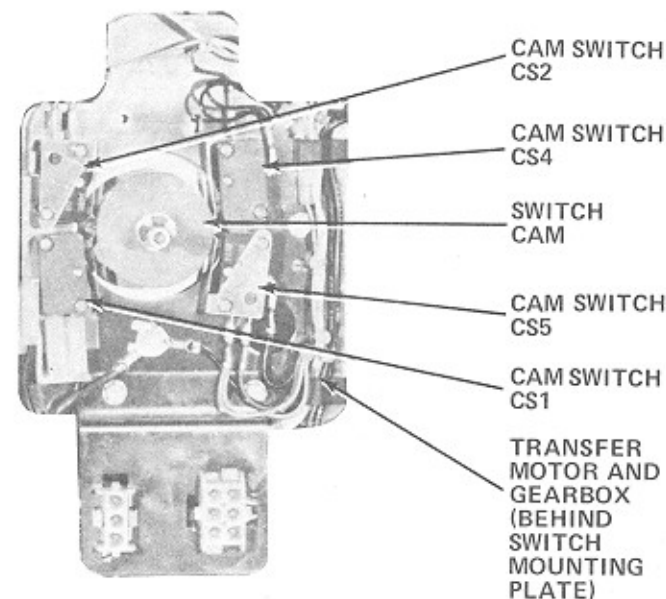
CAM SWITCH AND MOTOR ASSEMBLY COMPONENTS
